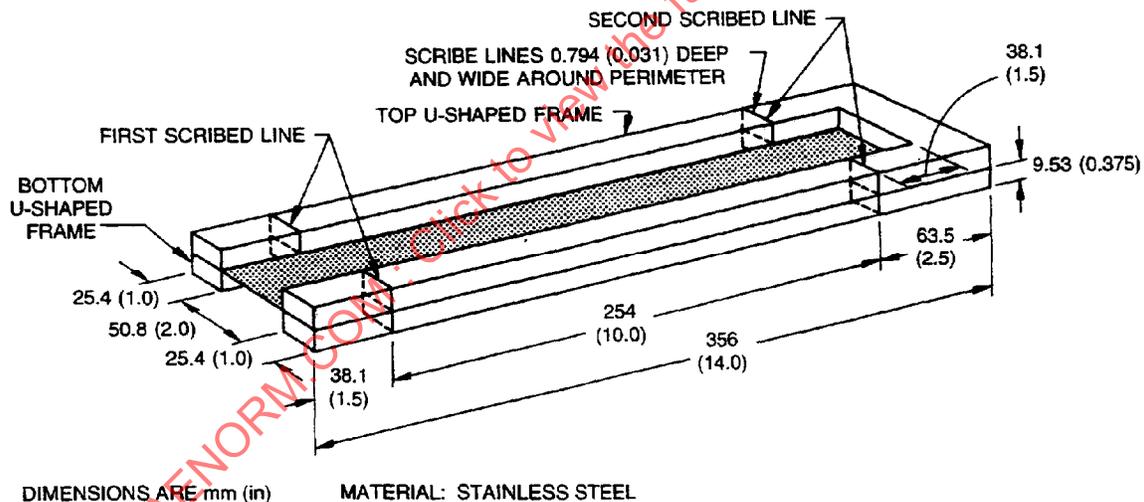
SPECIMEN HOLDER, CONSISTING OF TWO IDENTICAL U-SHAPED FRAMES
